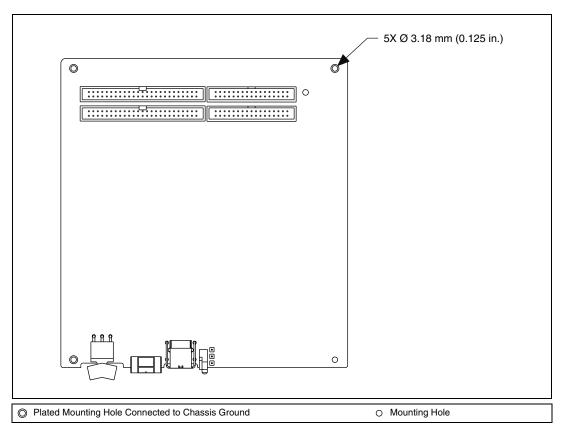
Customer Mounting Holes (NI USB-6343/6361/6366 OEM Shown)
